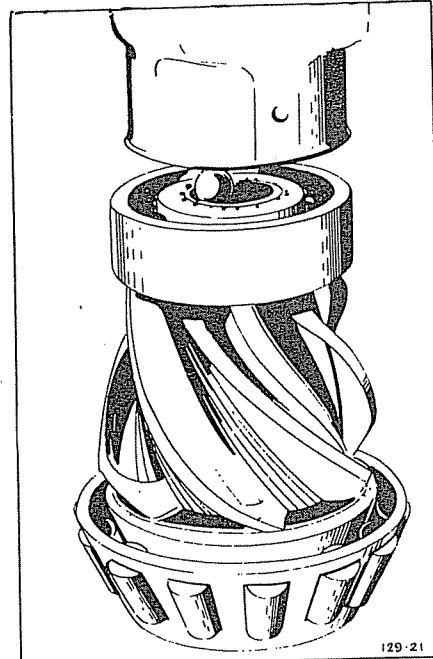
Staking Pinion Shaft Using a Ball Bearing.
